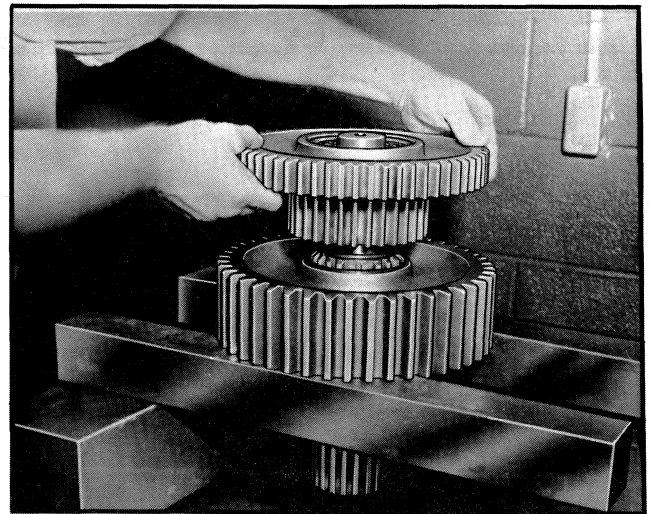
Mounting Double Gear on Output Shaft ^{F17D}
